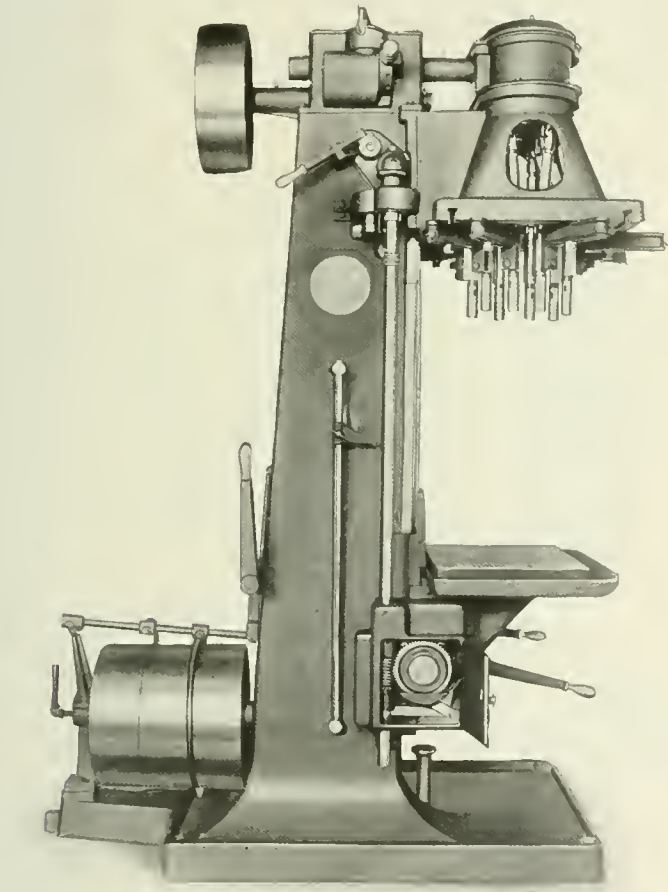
Fox No. 3 Multiple-spindle Drilling Machine
